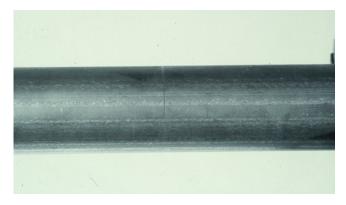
Fatigue Failure of a Titanium Tube in a Nuclear Power Plant Condenser (Pettigrew et al, 1991).
